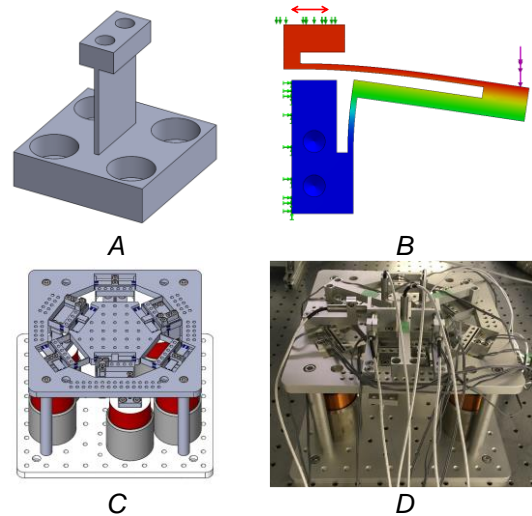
Decoupler for VCAs (A); motion steering mechanism (B) between the six-axis flexural stage and linear actuators; CAD model (C) and prototype (D) of the six-axis parallel nanopositioner
